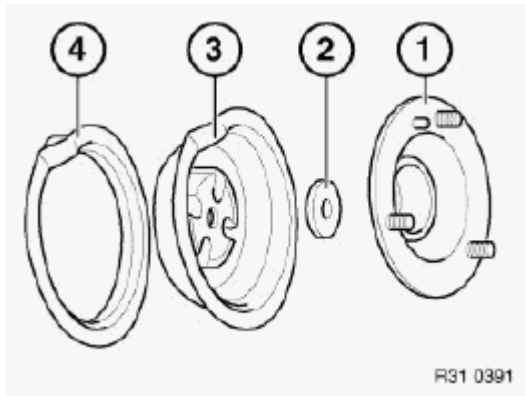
Spring Plate, Support Bearing And Dust Sleeve And Shim
